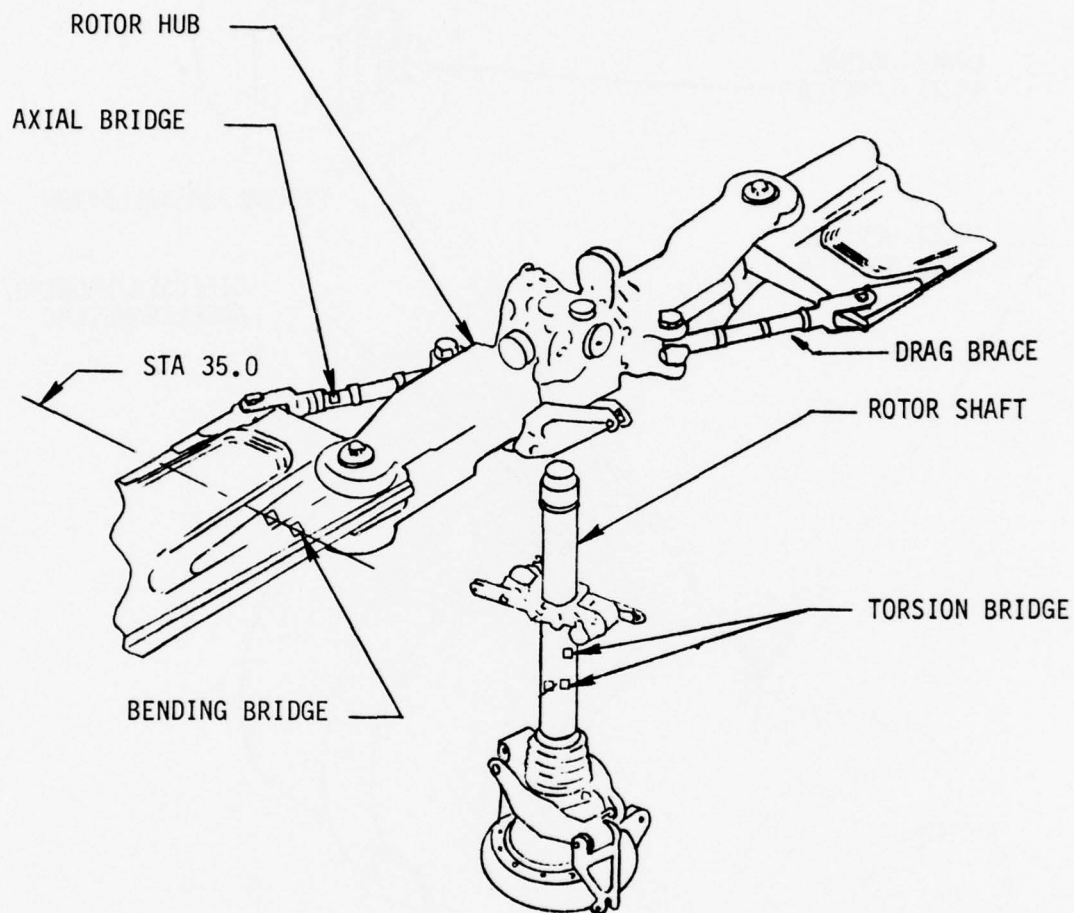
Strain Gage Installation - Rotor Blades and Shaft
